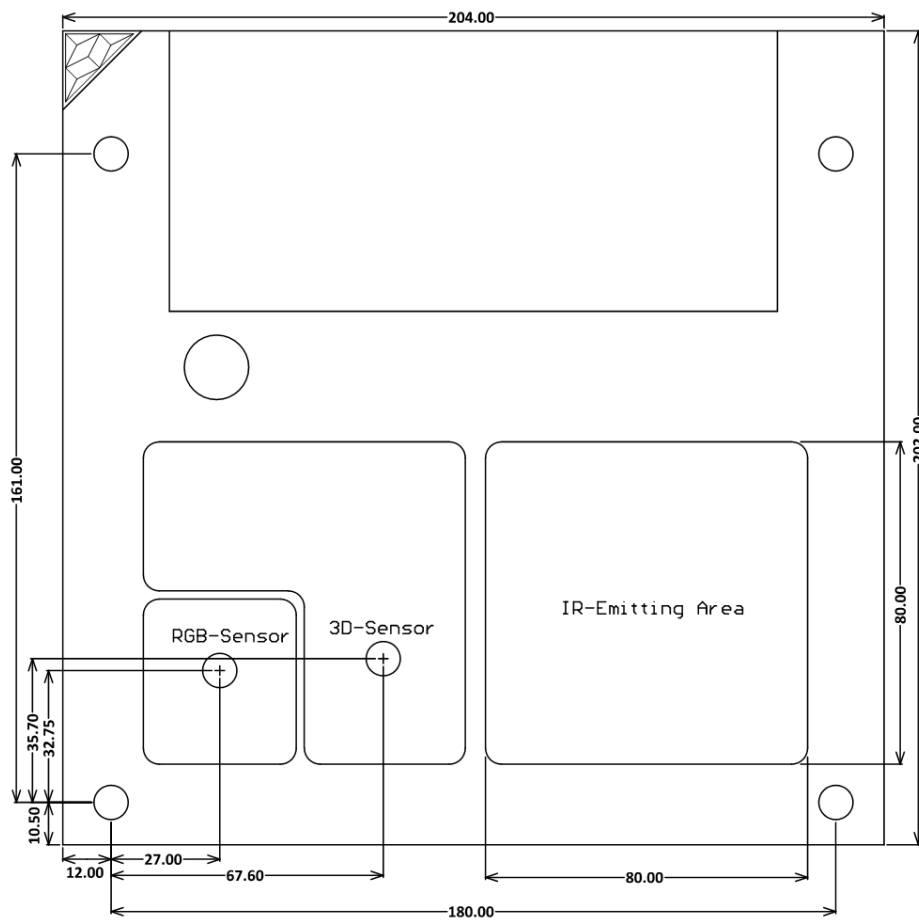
Sensor position and IR-emitting area (dimensions in mm)
